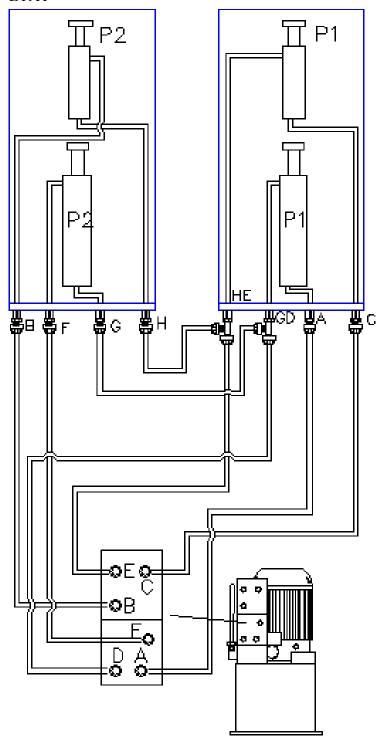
HYDRAULIC PIPES CONNECTION MODEL "N" AND "AT" + PD8M
